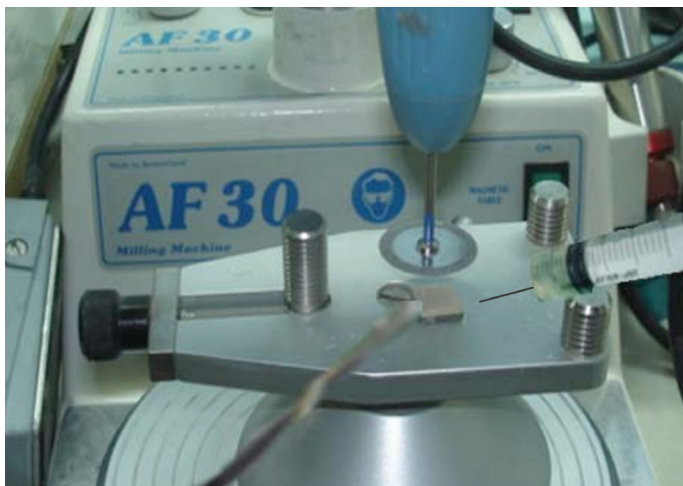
Controlling the thickness of porcelain layer by using a milling machine
